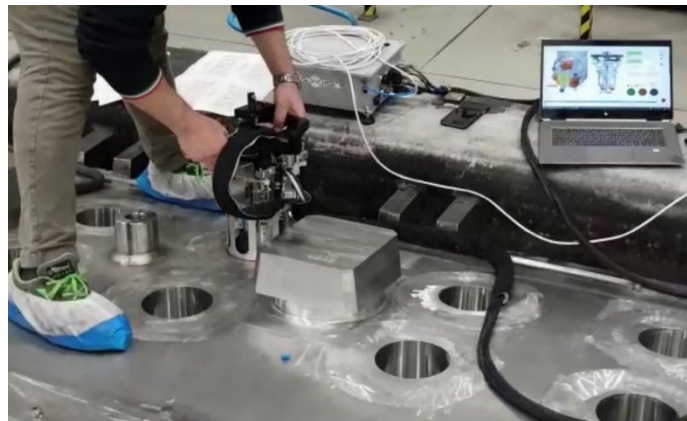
Ad-hoc measurement tool for VV datum reconstruction
